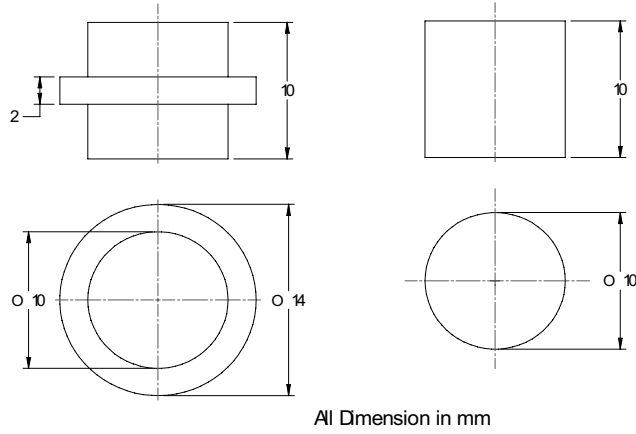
Geometry of work piece (a) Flanged specimen (b) cylindrical specimen
